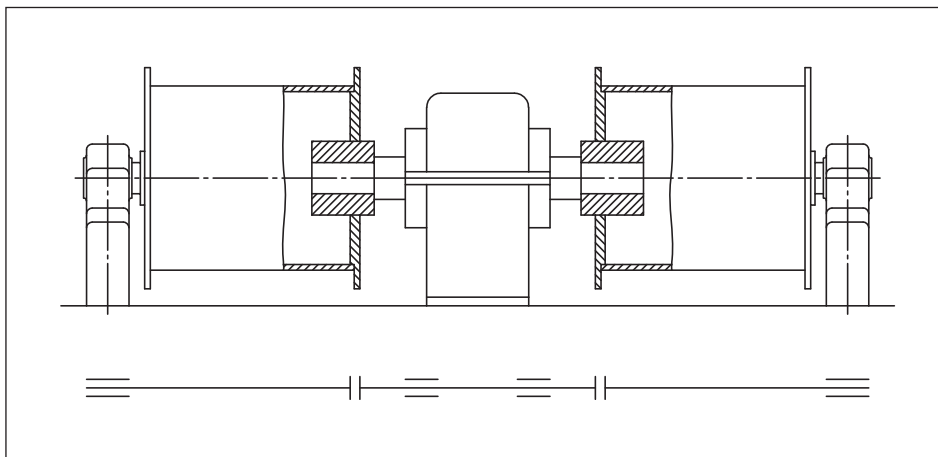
Layout of a twin drum drive with four-point beared rigid shaft without a Drum-Coupling.
